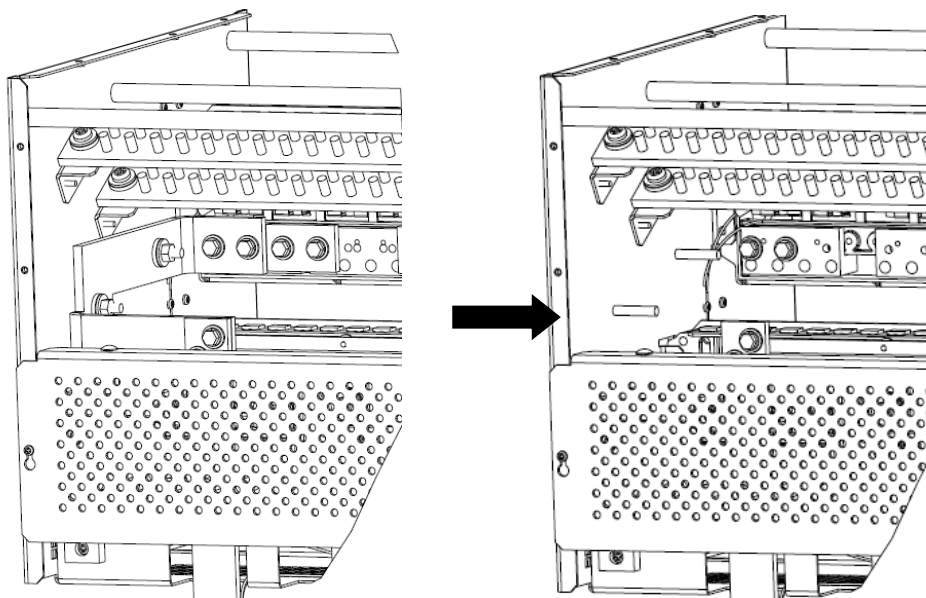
Removing and Sleeving the +24V or -58V FA Cable Lug with Heat Shrink Tube
